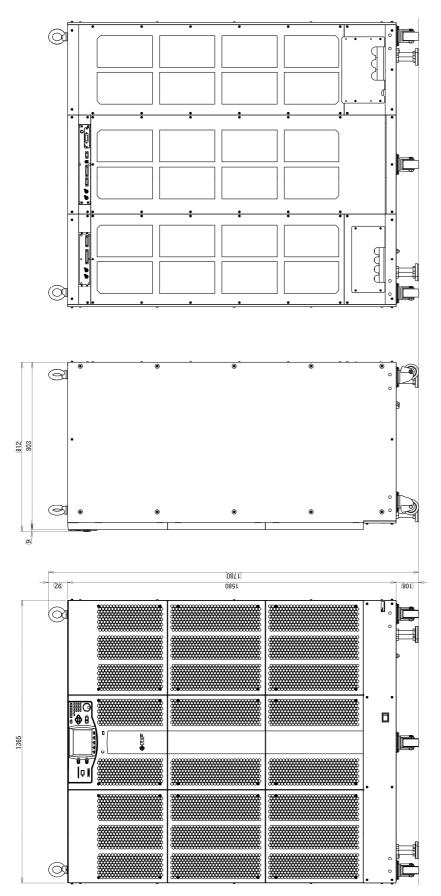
DP420LS/DP480LS Outline Dimensional Drawing (Type 6L cabinet)
